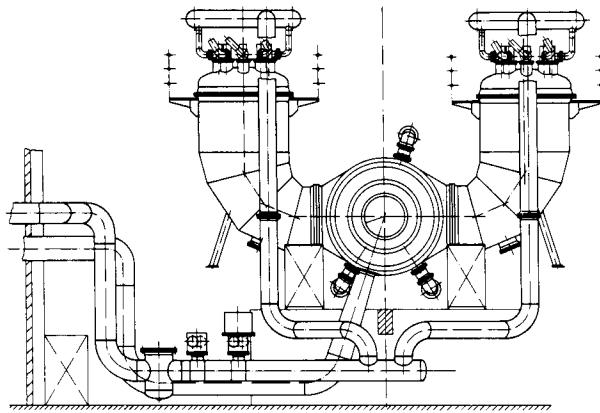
V94.2 Buggenum, Coal Gas Piping
